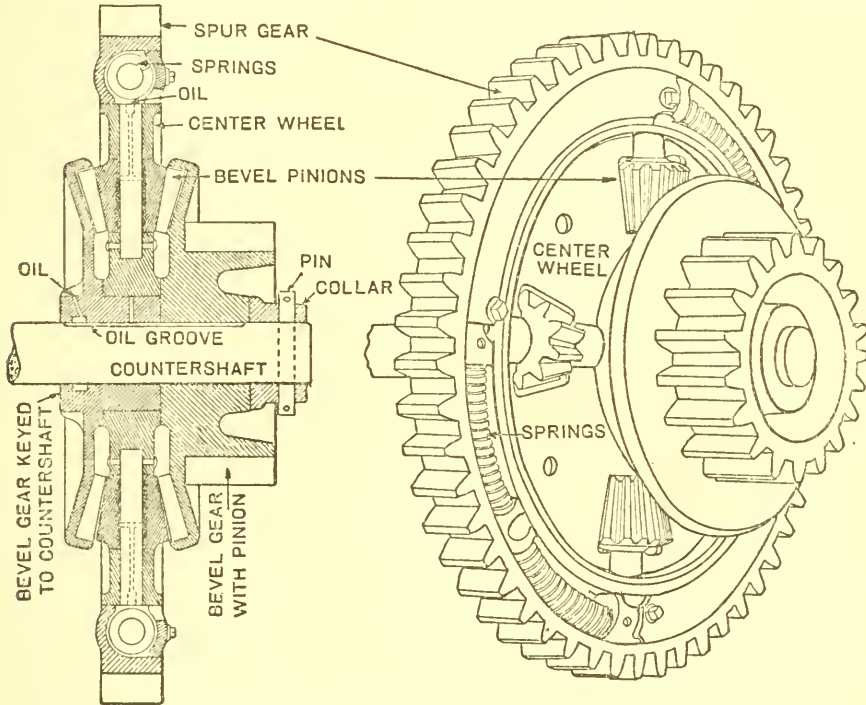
THE DIFFERENTIAL GEAR, SHOWING SPRINGS.
